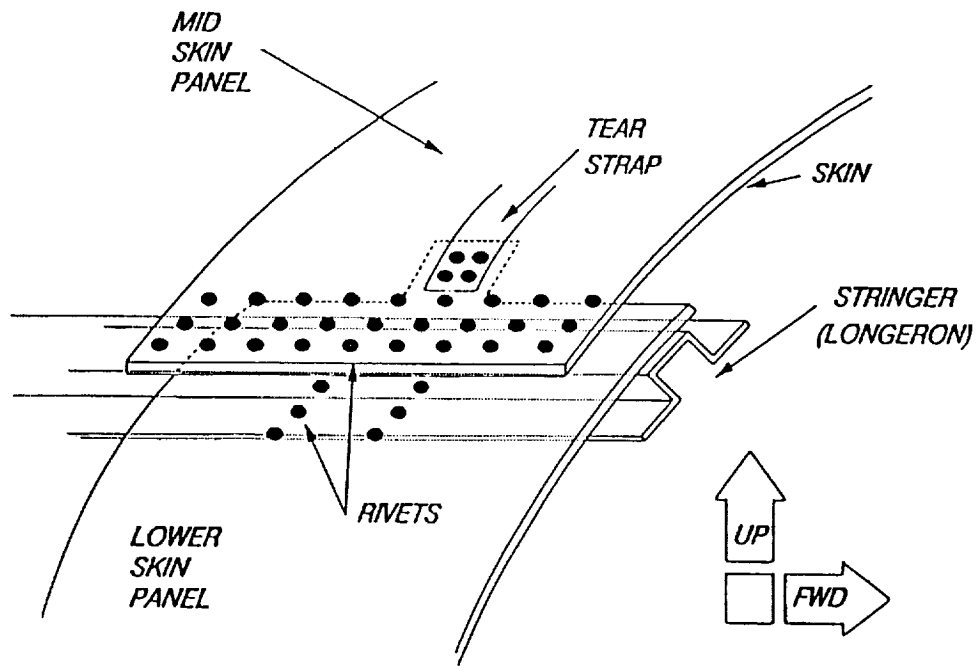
SKETCH OF TYPICAL RIVETED LAP-JOINTED FUSLEAGE PANELS (FROM REFERENCE [4])
